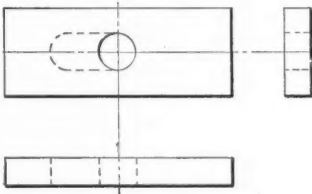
Form of Clamps used in Jigs and Fixtures.
